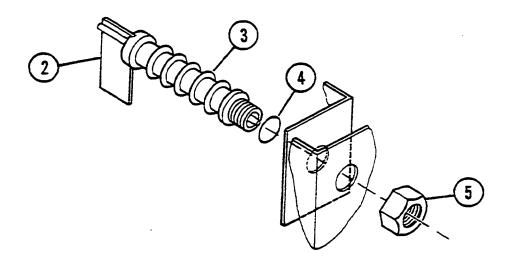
WATER LEVEL PROBE ASSEMBLY
